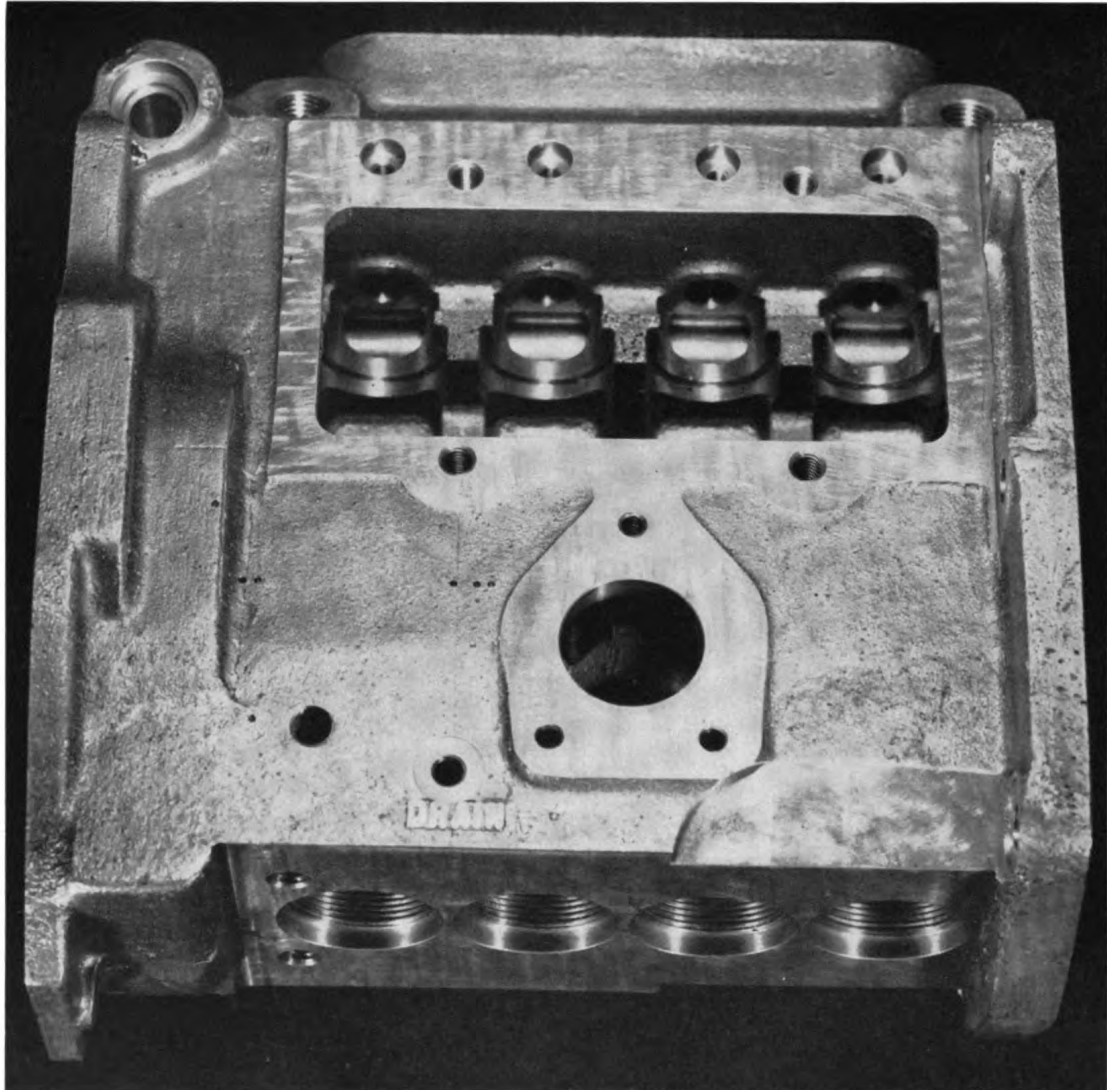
Examples of parts completely machined in lots of 100 on a Jig Boring machine.
